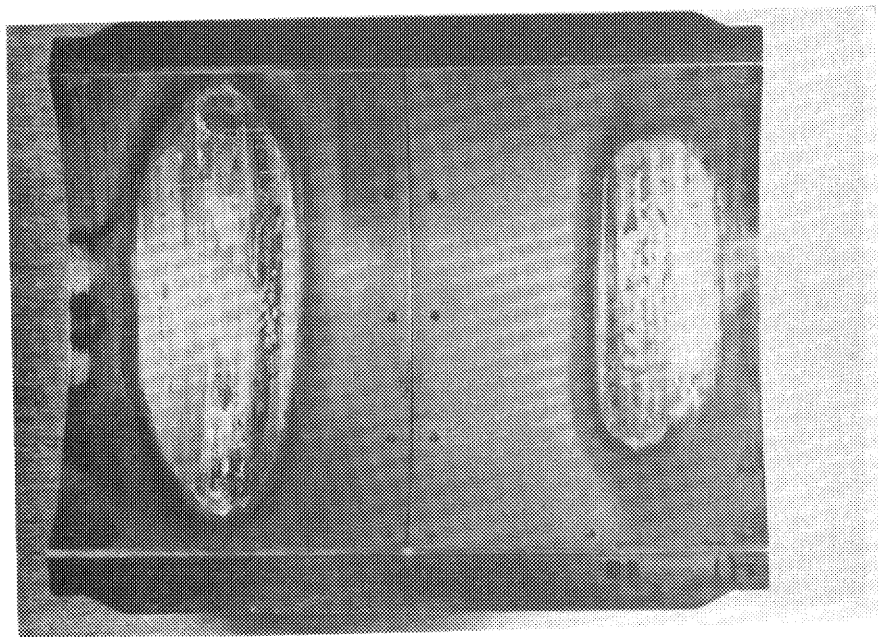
Damaged Upper Journal Bearing Pad
